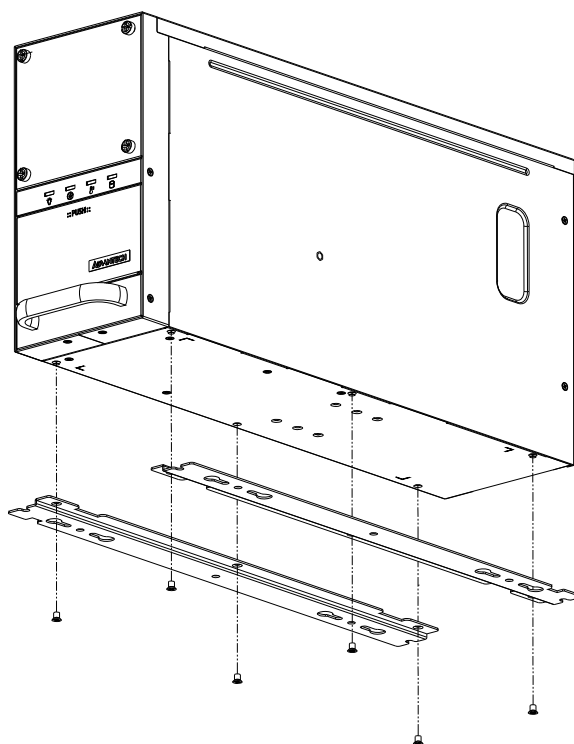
Installing Wallmount Brackets/ 安装壁挂式支架 / 安装壁掛式支架
